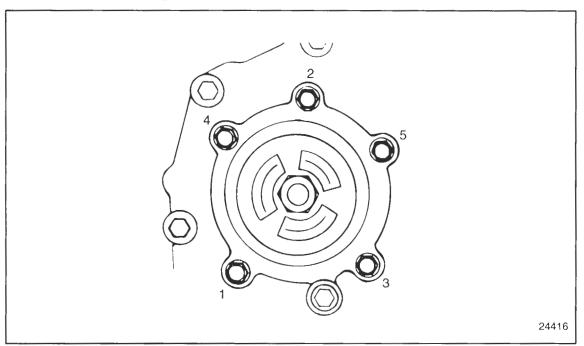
Accessory Drive Housing Bolt Torque Sequence
